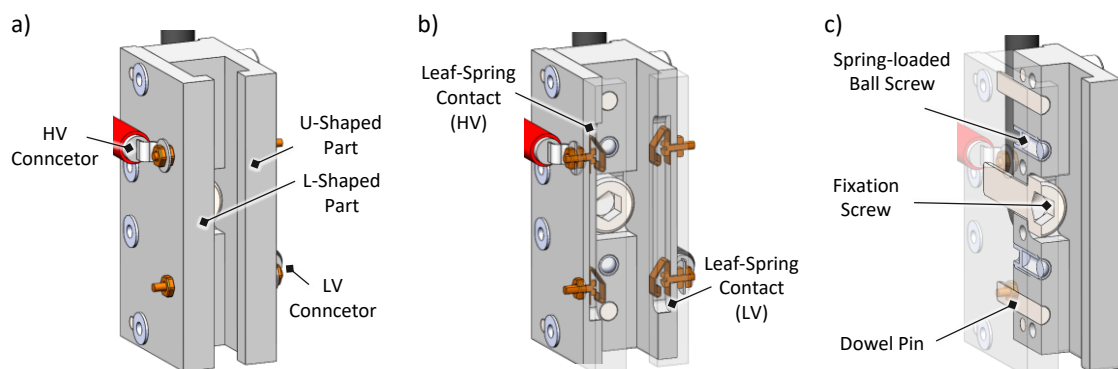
CAD design of DET sample grips with electrical leaf spring contacts and mechanical lock-in mechanism via spring-loaded ball screws as an overall 3D view (a), with frontal cross-section view (b), and with lateral cross-section view (c).
